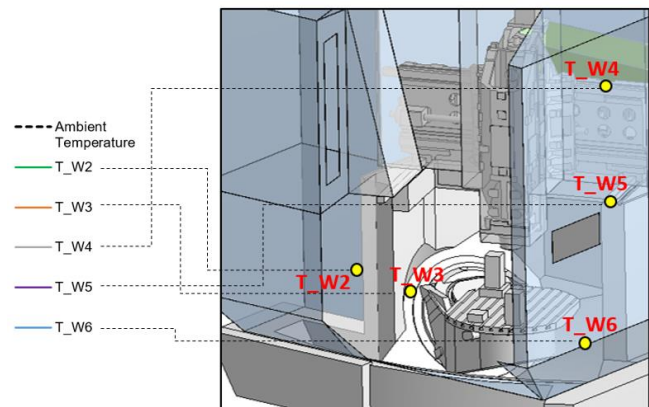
Cooling effects of cutting fluid in a machine tool workspace
